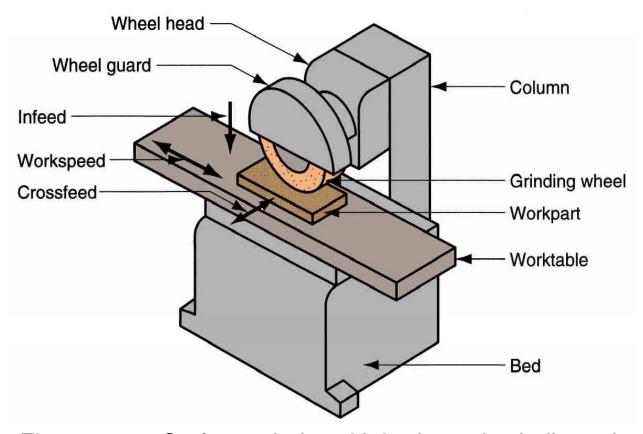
Surface grinder with horizontal spindle and reciprocating worktable (most common grinder type)
